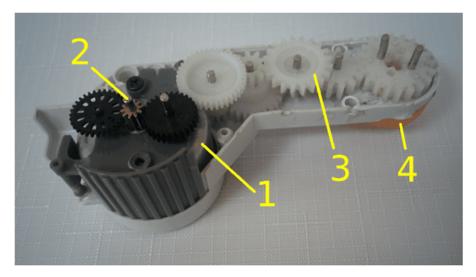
NXT motor disassembled: 1 — DC motor 2 — it's shaft, 3 — reducer, 4 — NXT motor external shaft; (chip with encoder isn't shown).
